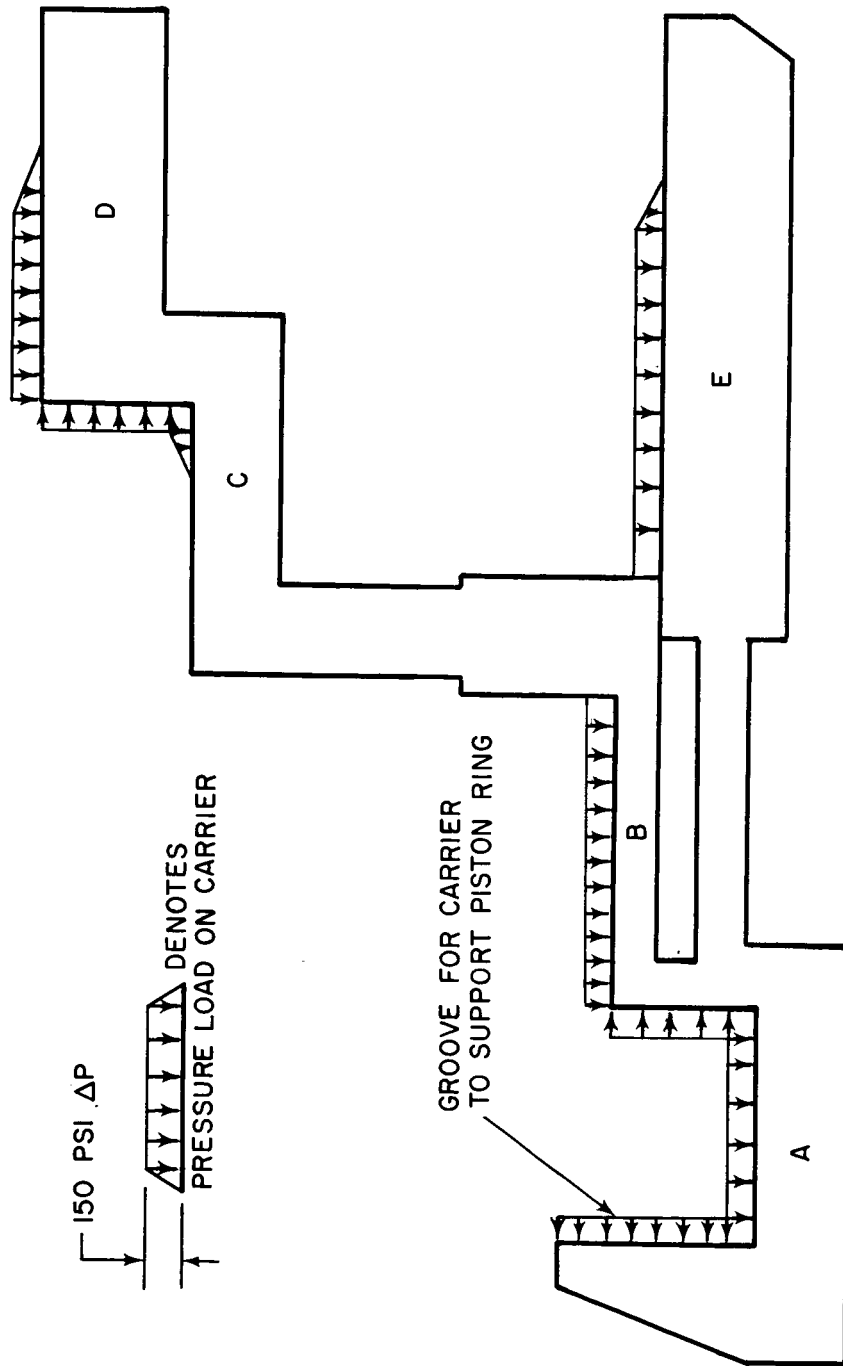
Seal Carrier Deflection with Piston Ring Groove in Carrier and Carrier at any Position
